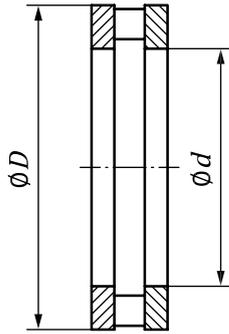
Thrust cylindrical roller bearings and thrust needle roller bearings
